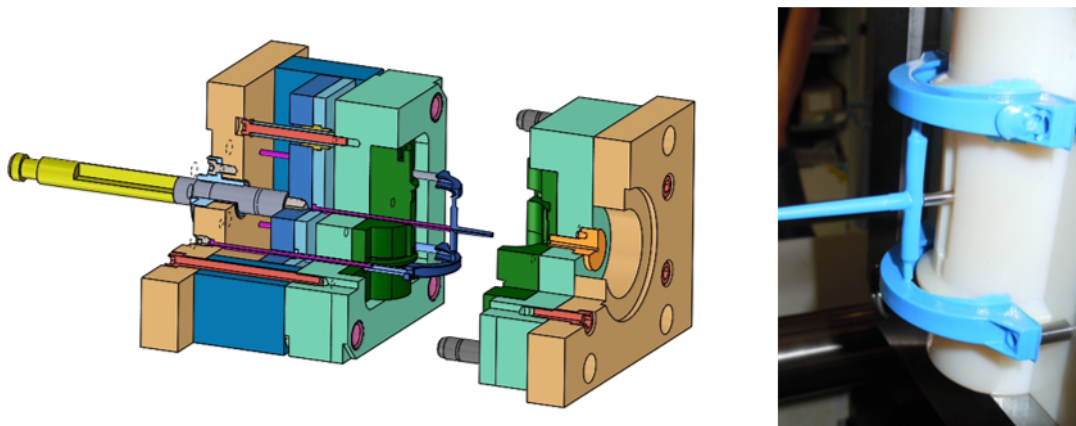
CAD design of the mould and mechanical adaptor (left) and moulded clamping rings (right)
